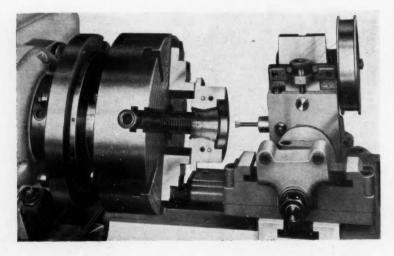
(above). Holbrook Model M No. 15/20 Mould Maker's Lathe. The Design of this Machine and the Equipment Provided Enable a Mould to be Completed in One Setting
